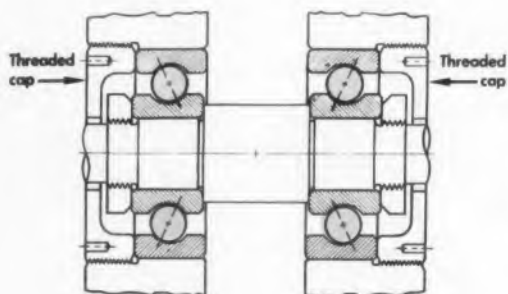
Threaded nut axial adjustment removes axial and radial play but is potentially troublesome unless faces of adjusting caps are held square with threads.
